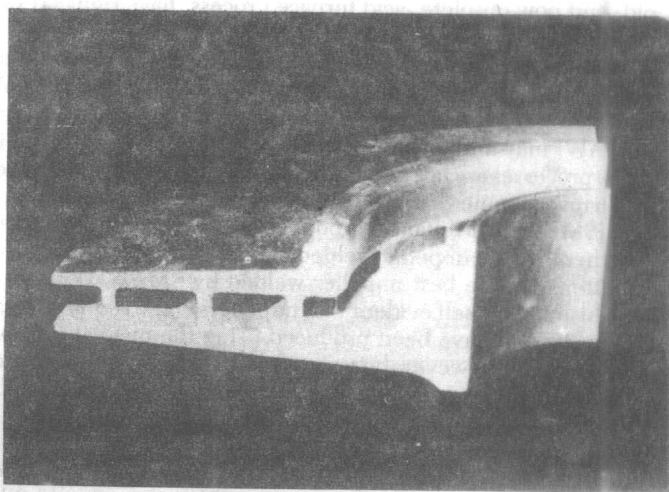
Section of Fabricated Impeller with Disc, Cover, and Blades.
